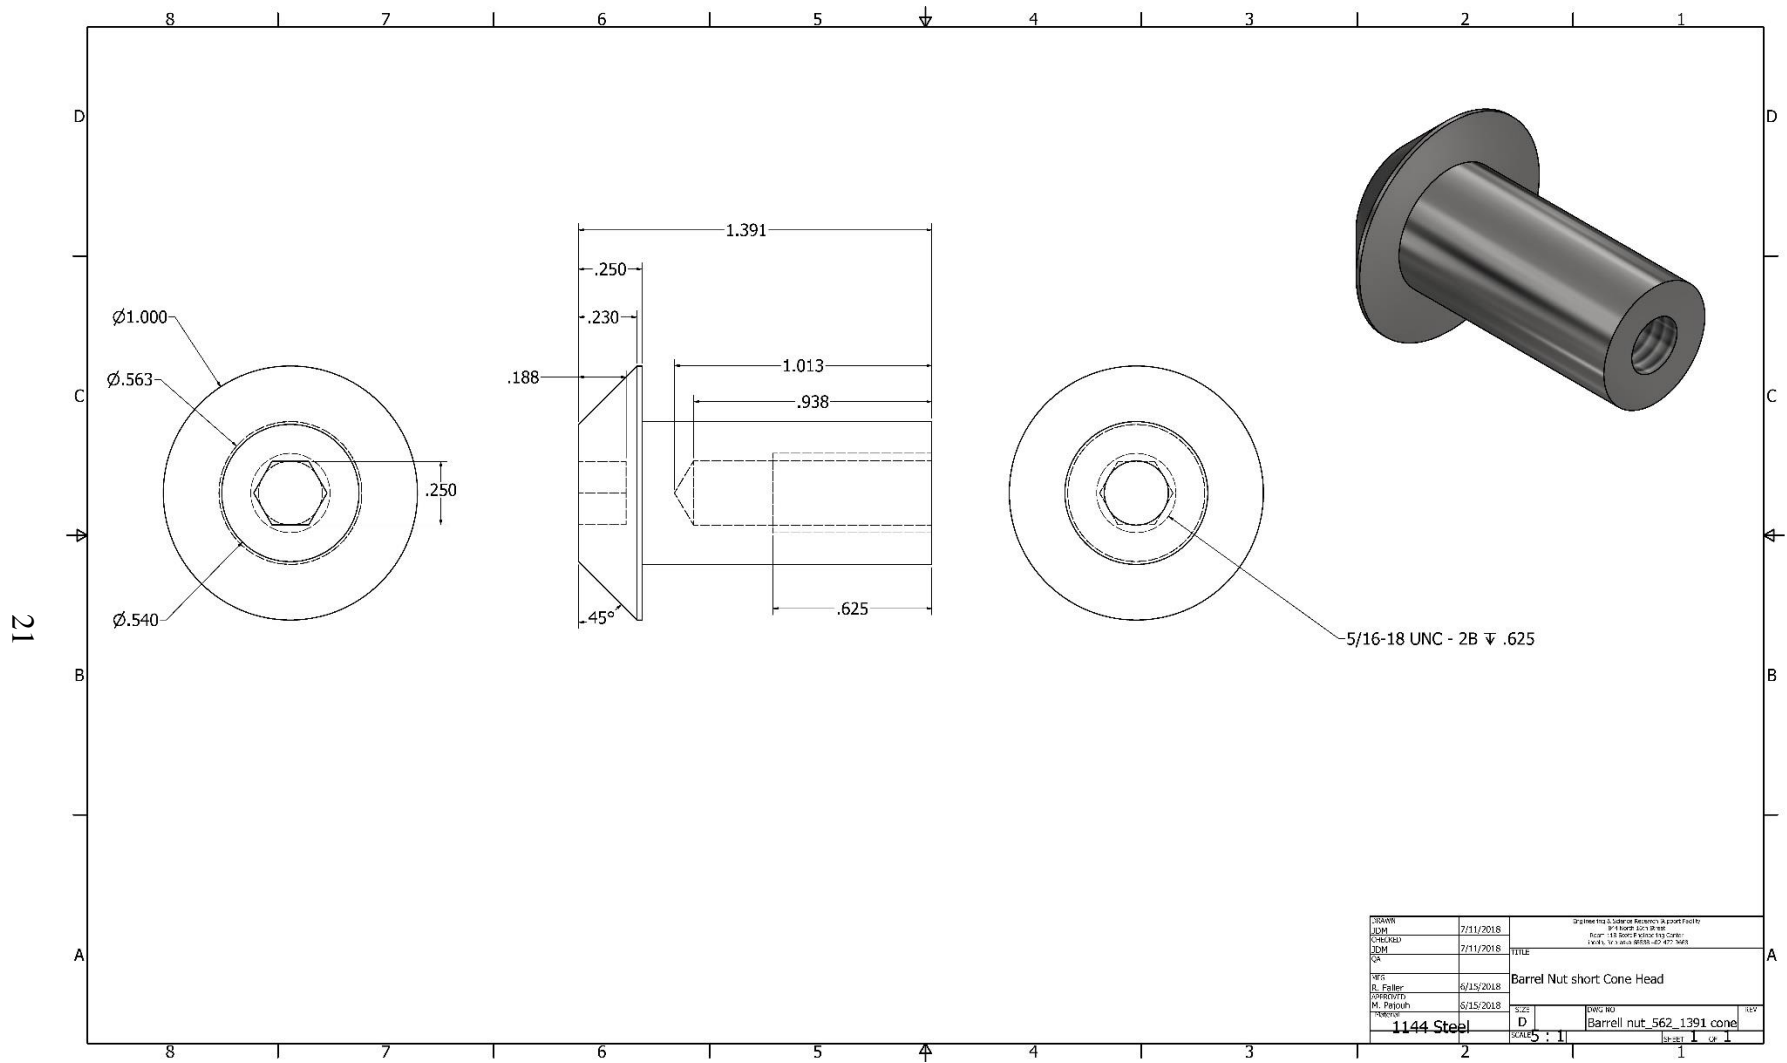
1.391-in. (35-mm) Long Barrel Nut with Cone Head Design
